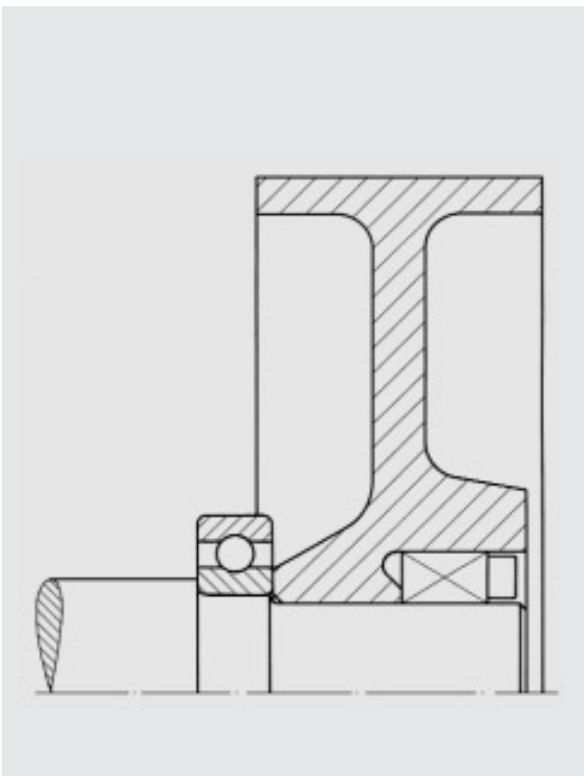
· Flywheel mounted using one Locking Assembly RfN 7012.
